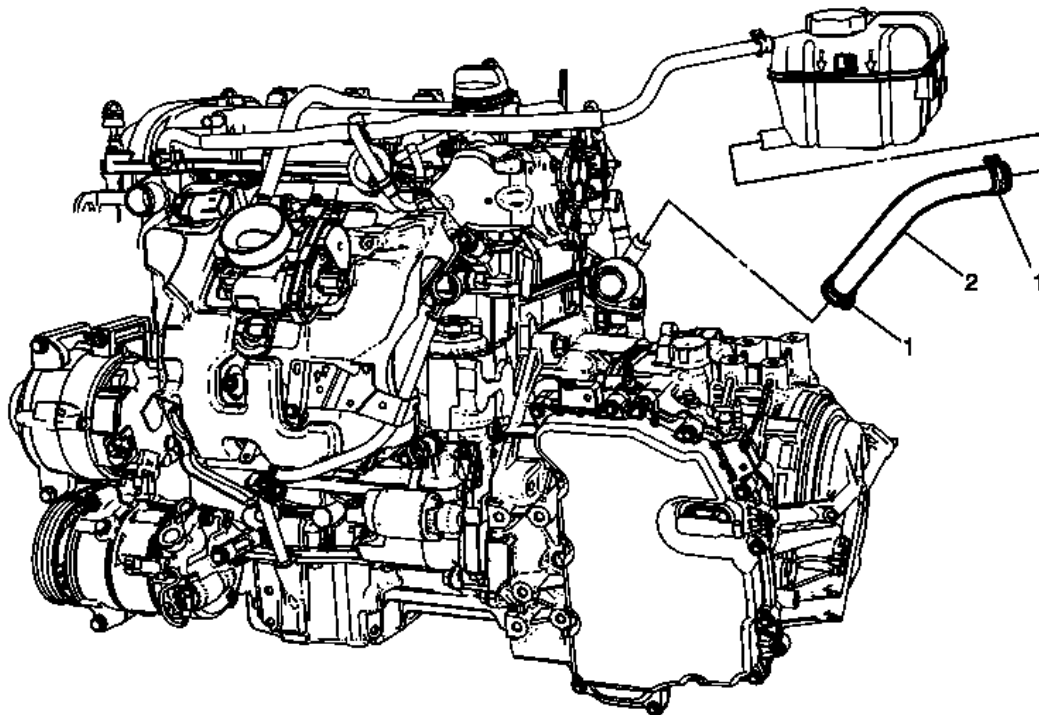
Radiator Surge Tank Outlet Hose (LEA)
